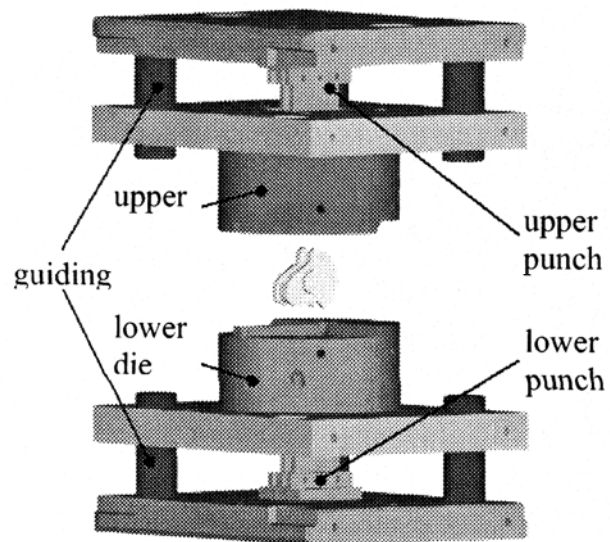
Tool layout for the final forming stage of a one-cylinder crankshaft from the study by Behrens et al. [2005].
